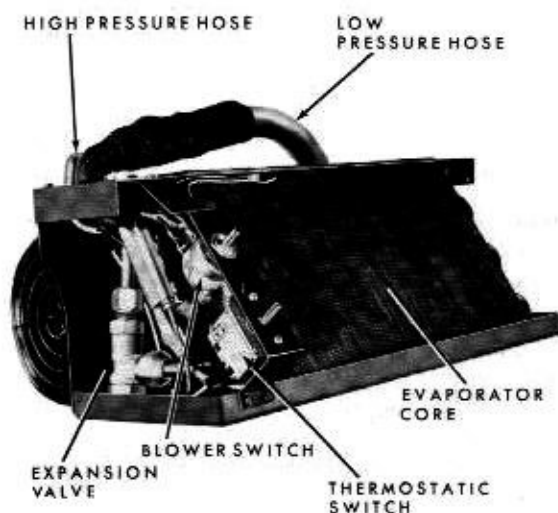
B-4—Evaporator with Front Cover Removed (61MT-8805)
